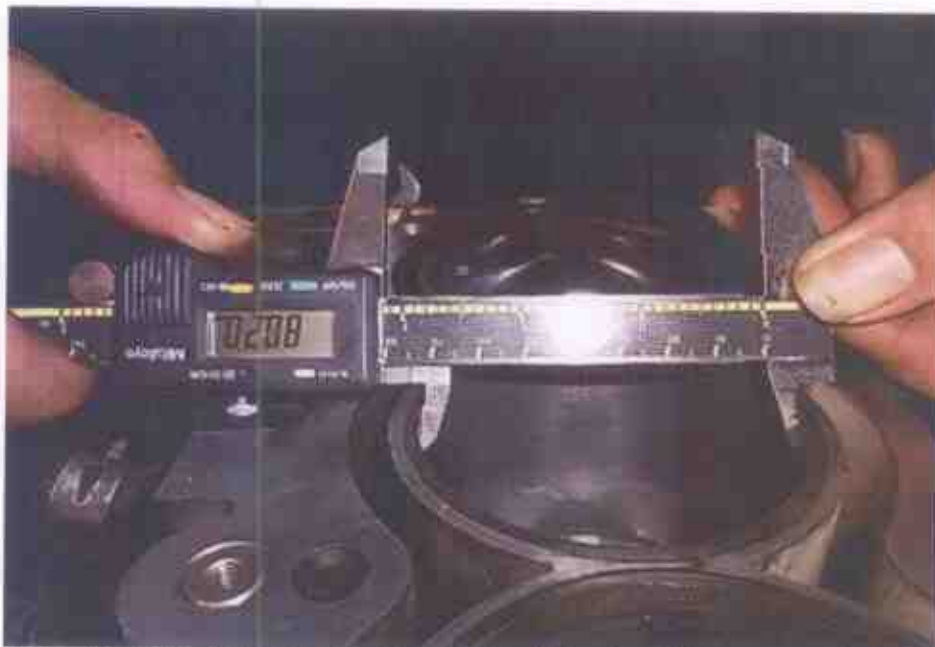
shows the bore measurement of cylinder 2, which was recorded to be 80.20mm.
